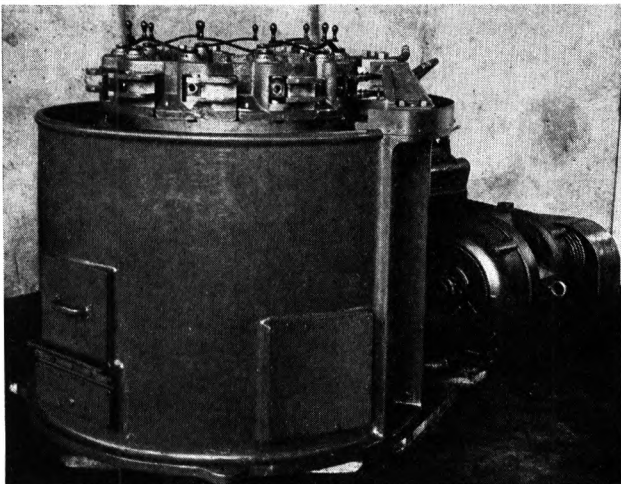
ROTARY, CONTINUOUS SURFACE-BROACHING MACHINE
